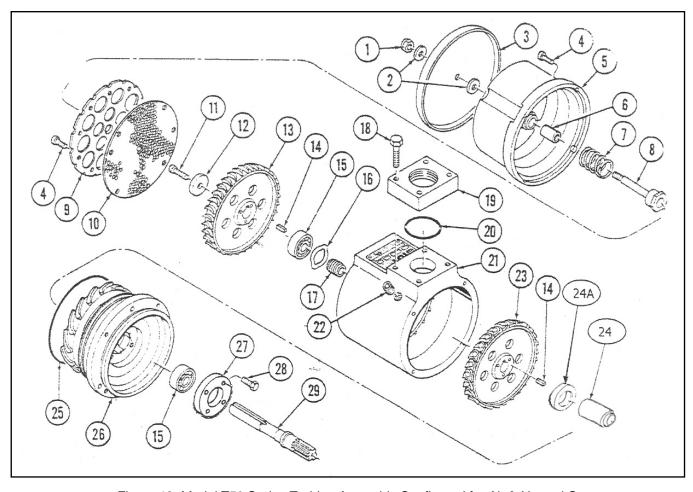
Model T50 Series Turbine Assembly Configured for Air & Natural Gas (Effective serial #: 0610-0994)
